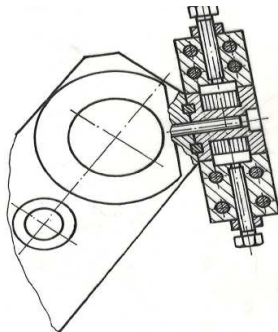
Fork sensor for detecting the cutting torque on the tool by recording the reaction in the bearing
